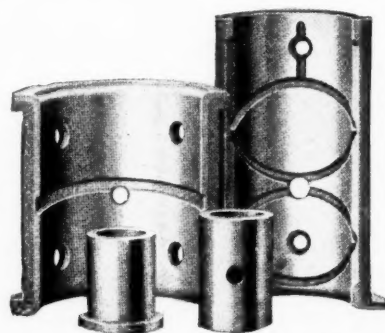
A group of bronze-backed bearings showing arrangement of oil grooves and chamfering.
